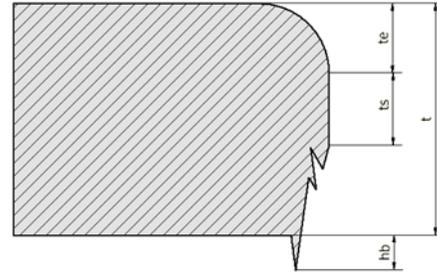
Form errors on sheared specimen, t: sheet thickness, te: rollover, ts: shear zone and hb: burr height
